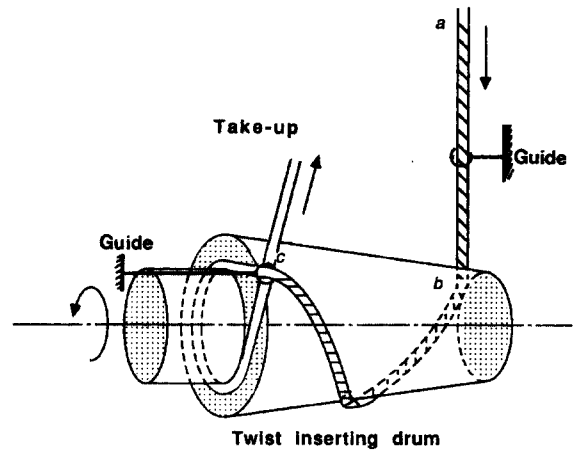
Schematic diagram of the cone drum type draw texturing machine.
